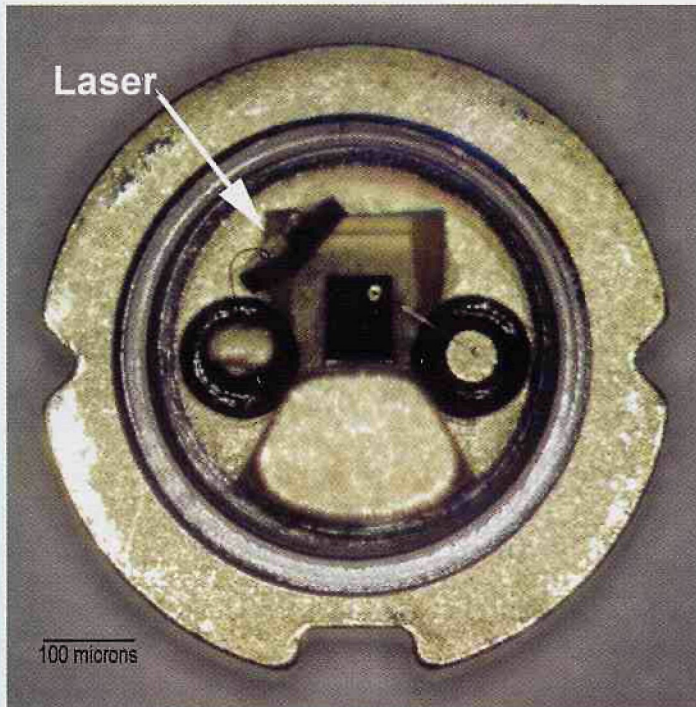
Depackaged laser device still attached to package by the bond wire.
